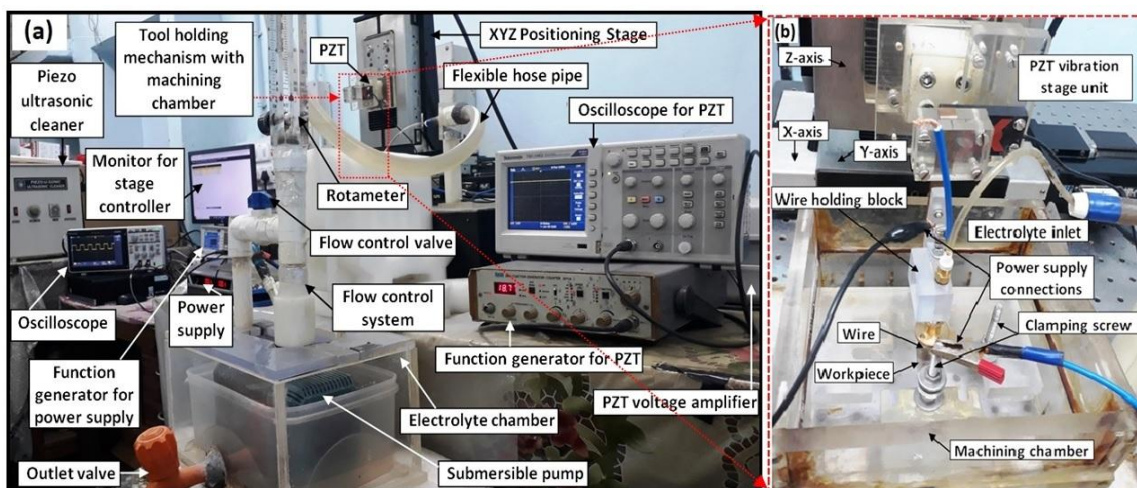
Photographic views of developed WECM experimental setup (a) Main machining unit (b) Tool holding mechanism with machining chamber
